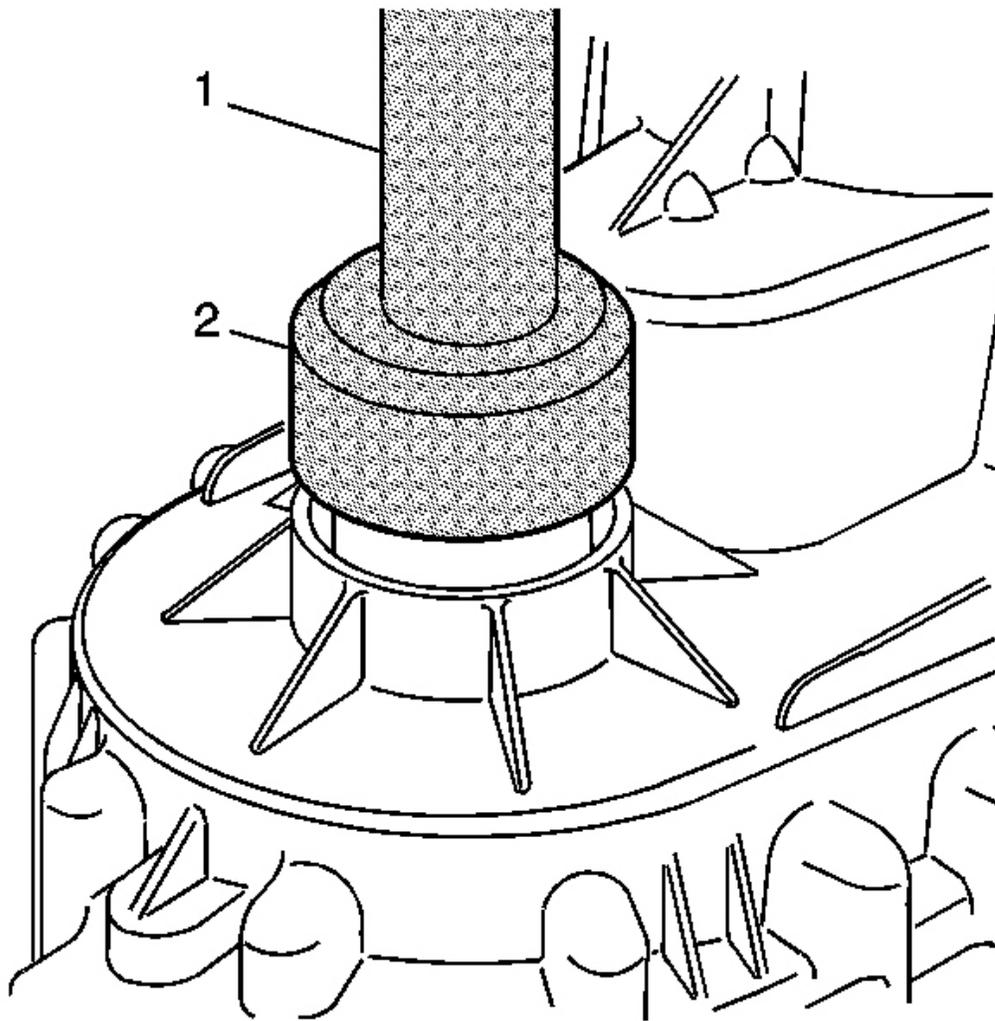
Installing Front Output Shaft Seal With J 43484 & J 8092
